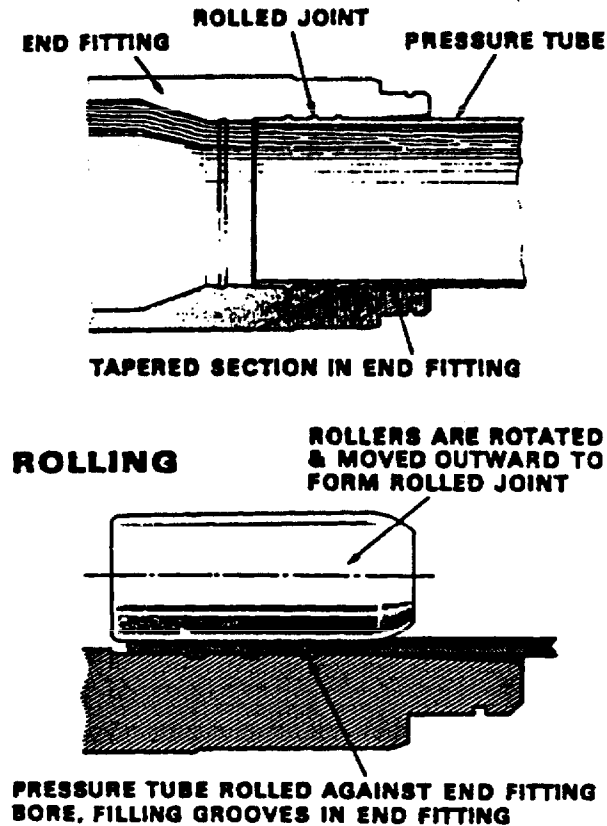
Rolled Joint Between Pressure Tube and End Fitting
